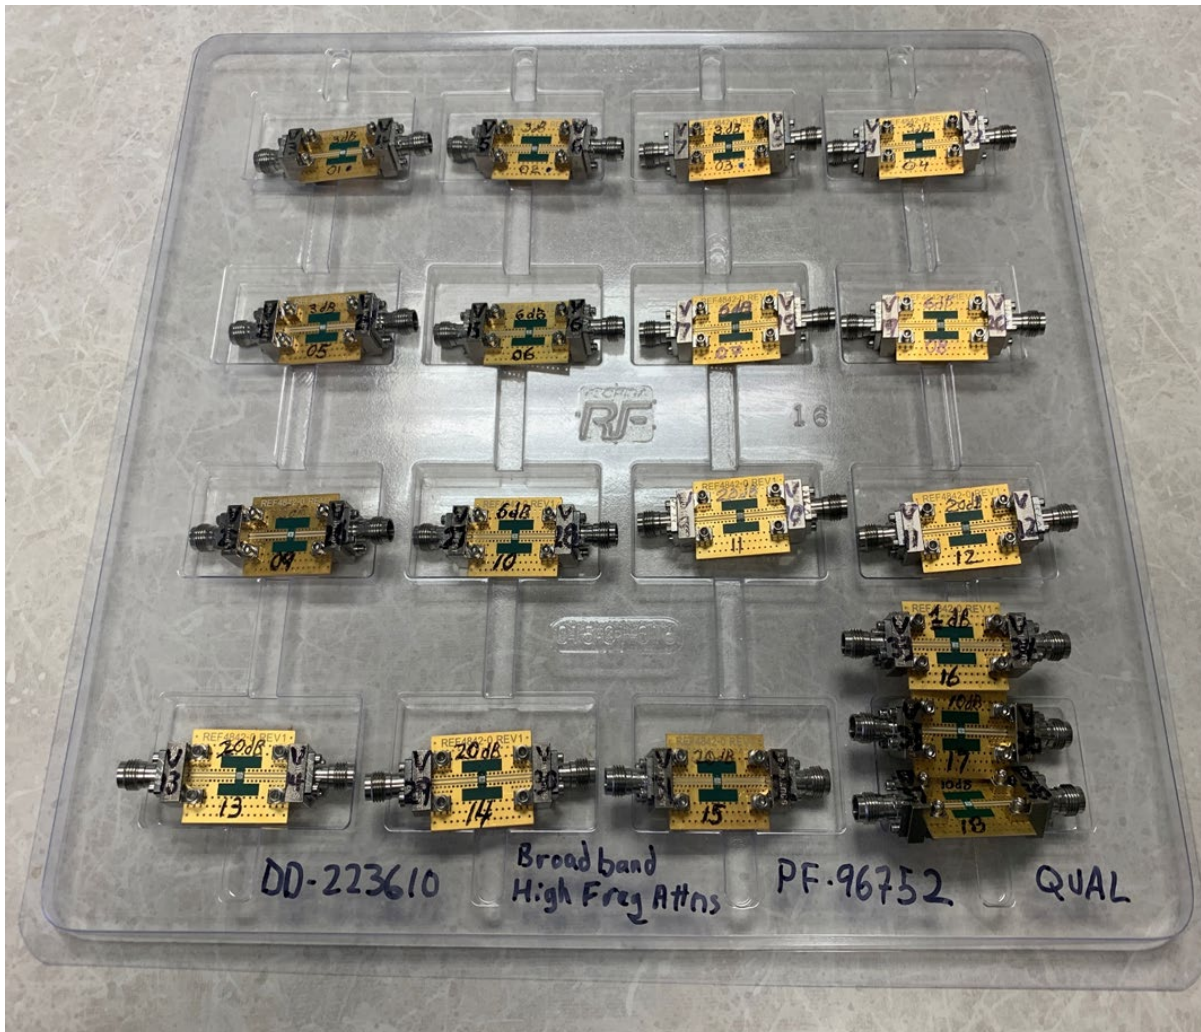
Group A inspection lot: test fixtures with the connectors installed
